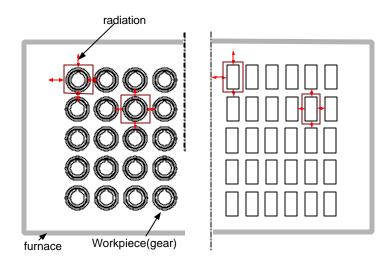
Radiation between furnace and workpiece, among workpieces
